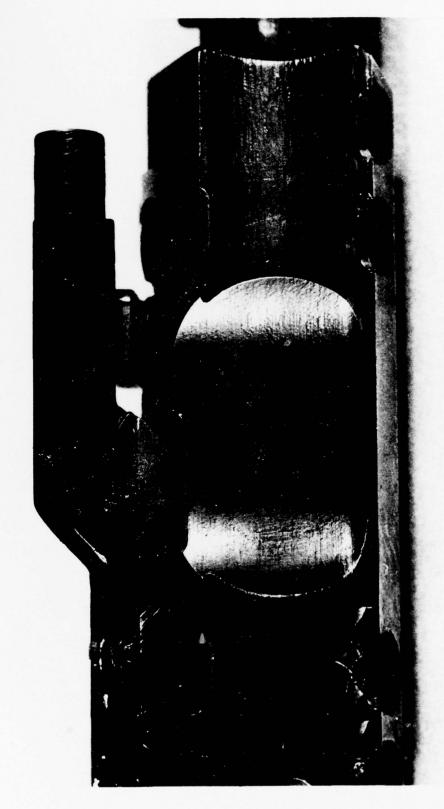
Right Side View of Bolt Carrier With Inserts Ready for Test.
